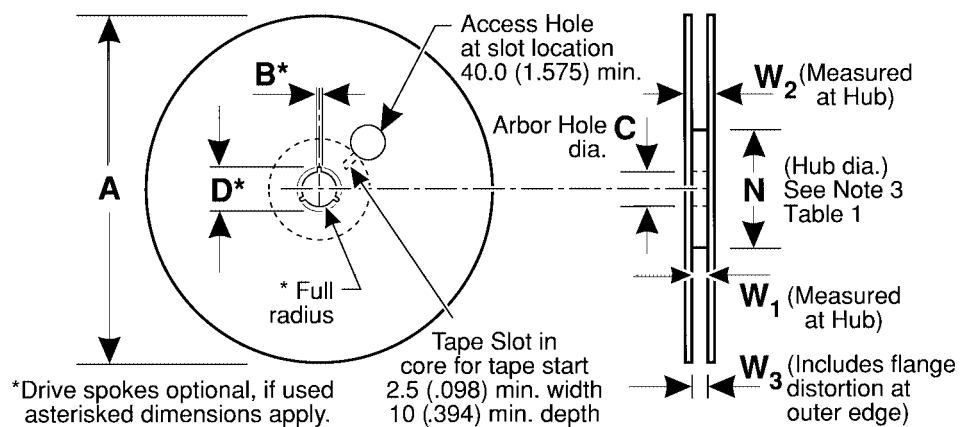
Reel Dimensions (Metric Dimensions will govern)
